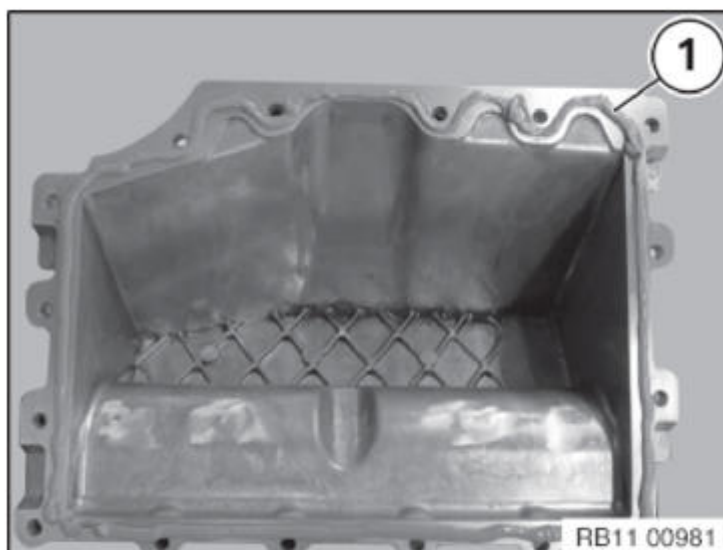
Cleaning Sealing Surface Of Oil Sump And Lower Section Of Crankcase With Special Tool (11 4 470)
